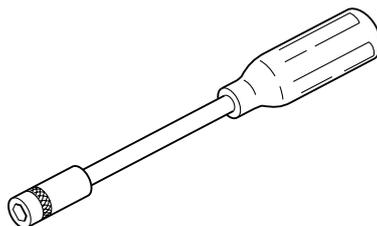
Hexnut screwdriver (option, part No. 670-18800)
